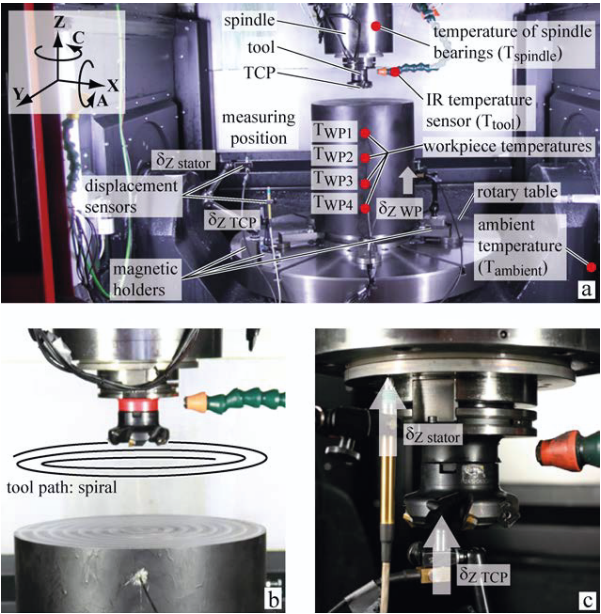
(a) Experimental setup on 5-axis milling machine; (b) Cutting process; (c) Measuring position.
